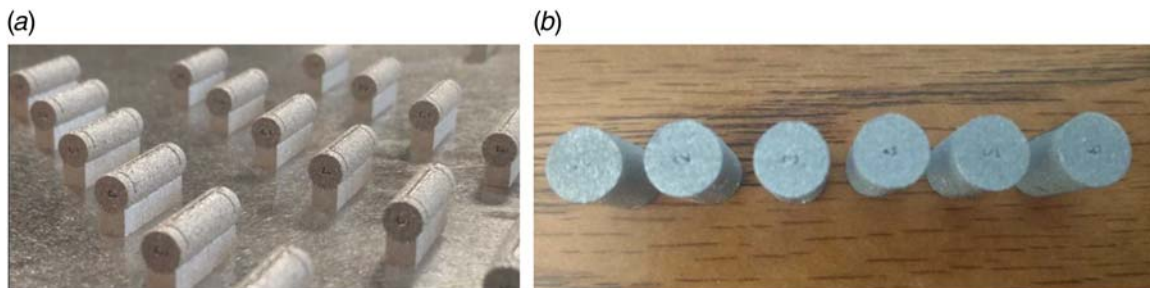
(a) Samples after removal from the machine and (b) after support removal
